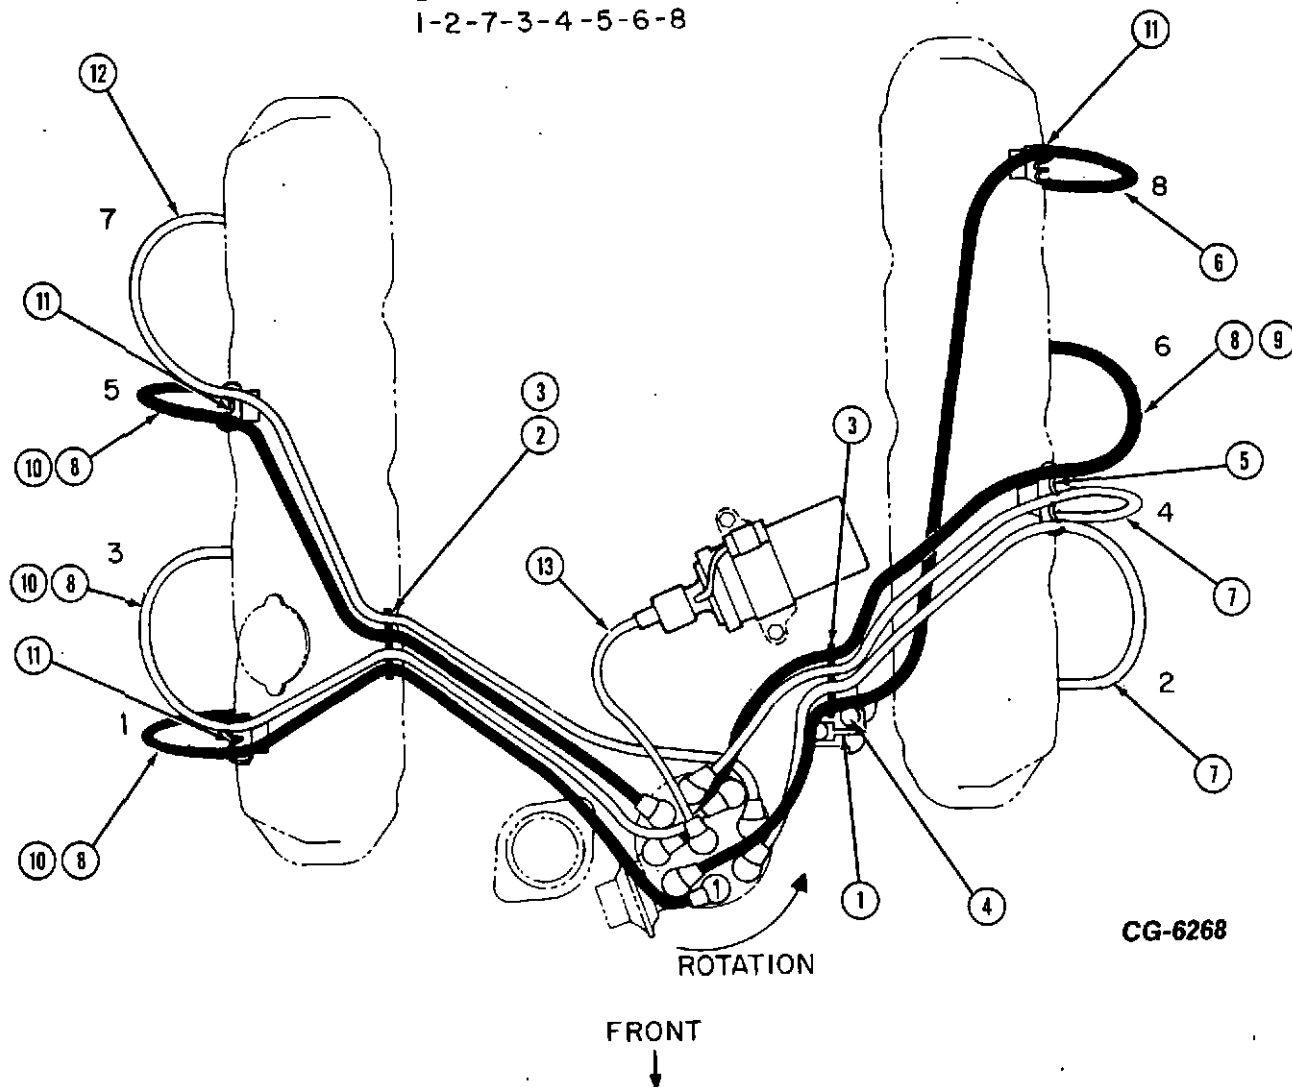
SPARK PLUG CABLE ROUTING FOR C-446 ENGINES
